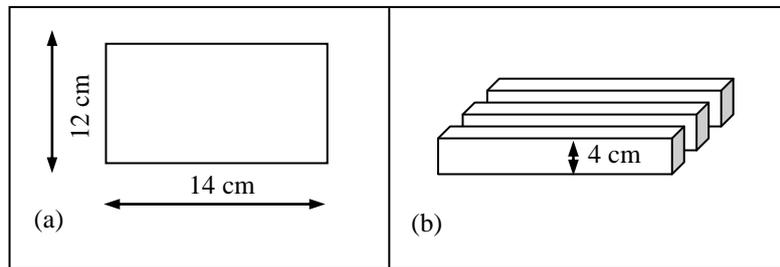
(a) Dimension of the samples, (b) samples cut with AWJ
